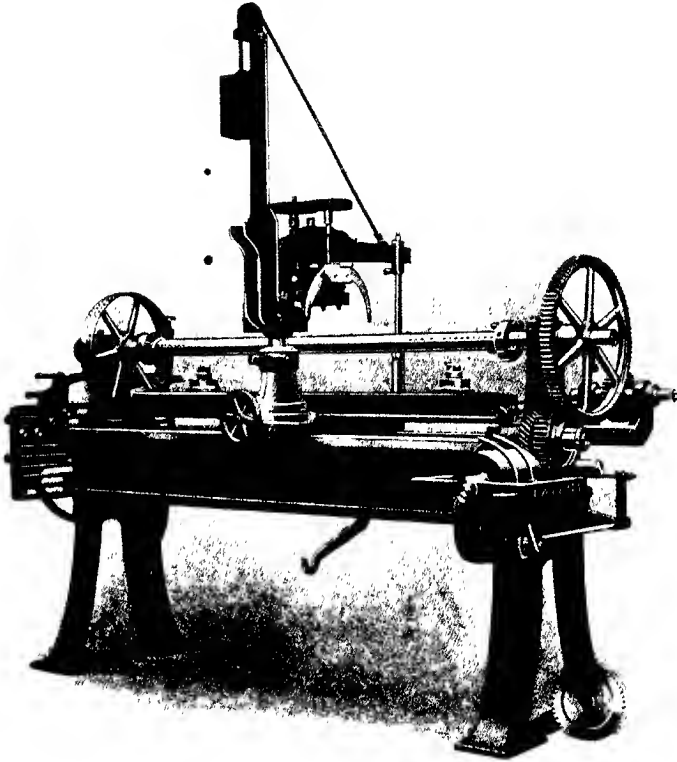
Mill Engraving Machine, with patented end-driving motion.
